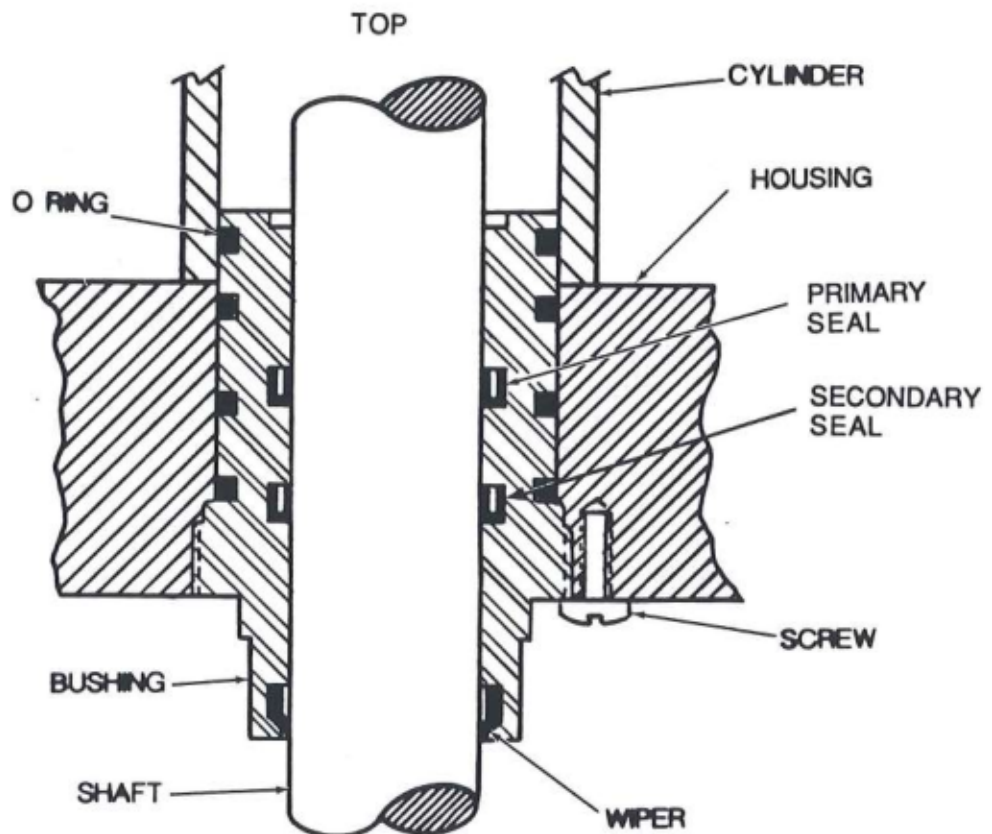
A. Assembled Seal, O-Ring, Wiper , and Bushing
